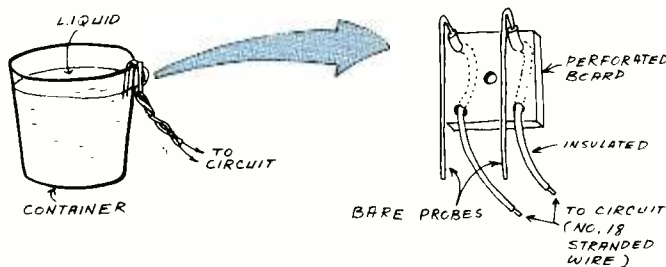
How to assemble a liquid level indicator probe to fit over the edge of a container.
